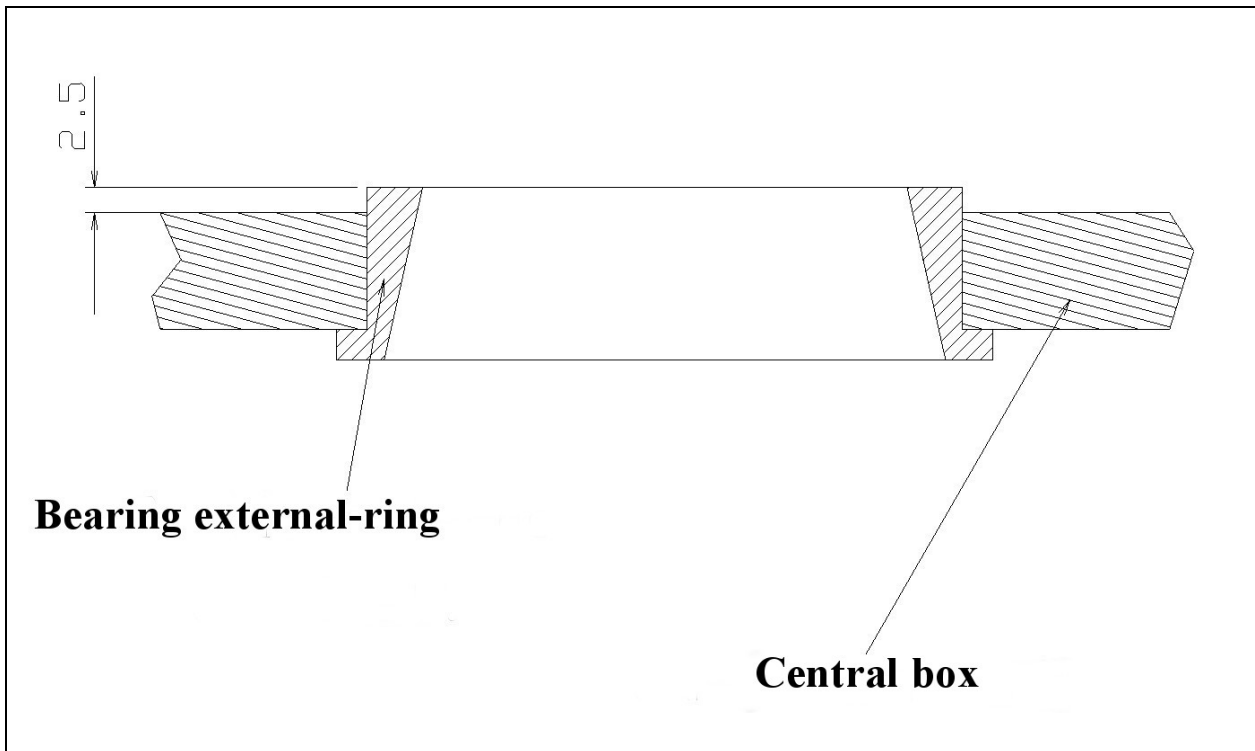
The face milling has to be 2.5 mm under the bearing external-ring.
